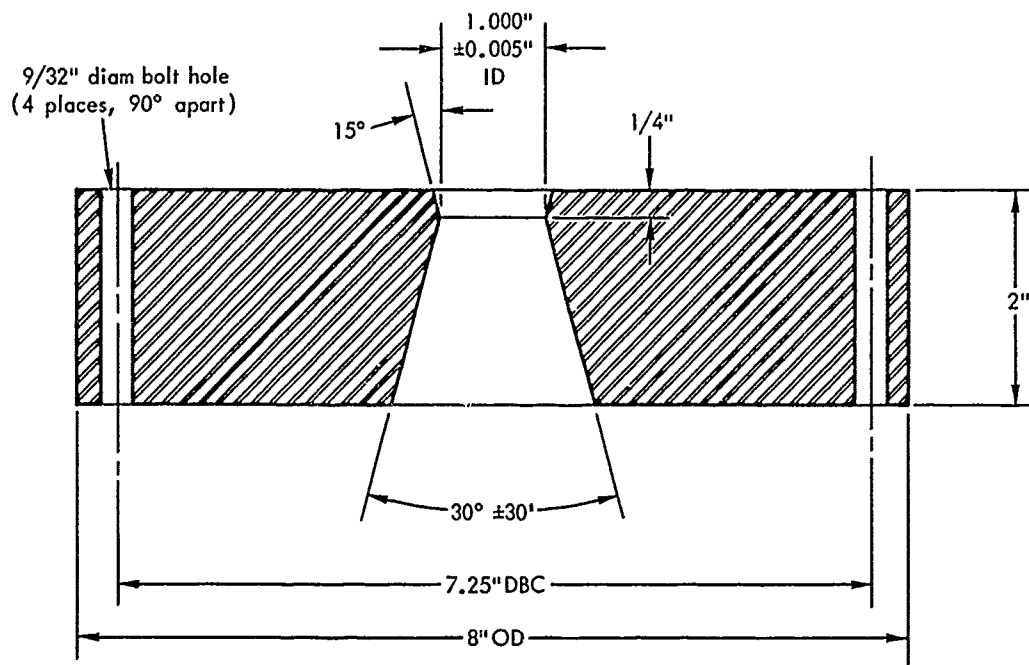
DOL Type II configuration mounting flange for 1-inch-diameter, 30° conical window exploratory tests.
